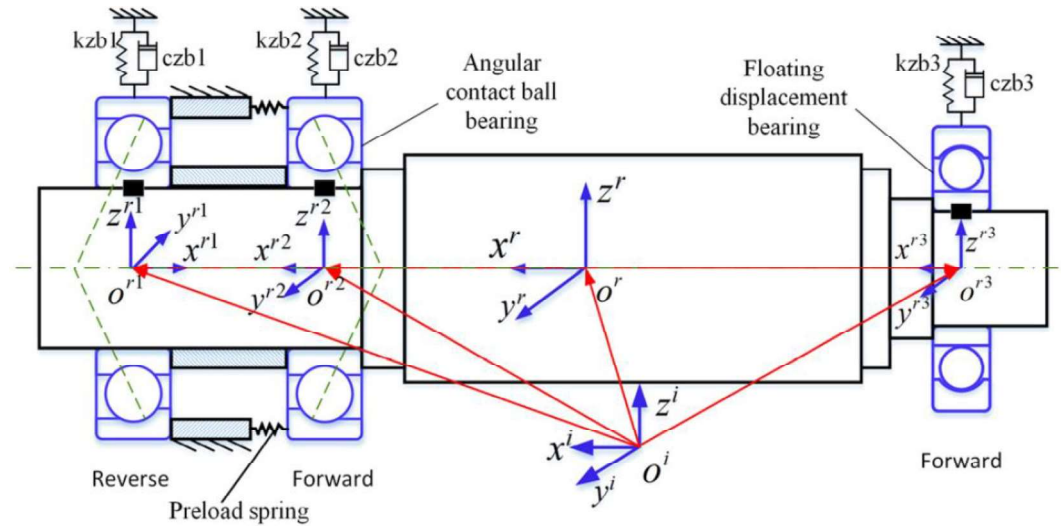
The Model of Spindle System Supported by Angular Contact Ball Bearings and Floating Displacement Bearing [27]
